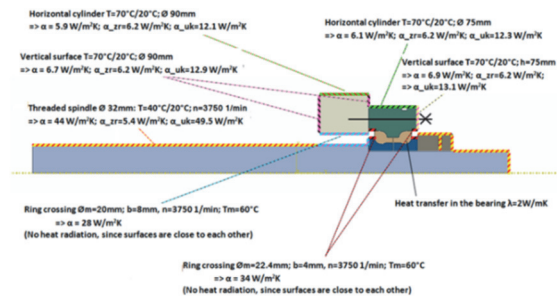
Determined heat transfer coefficients for the bearing assembly elements
